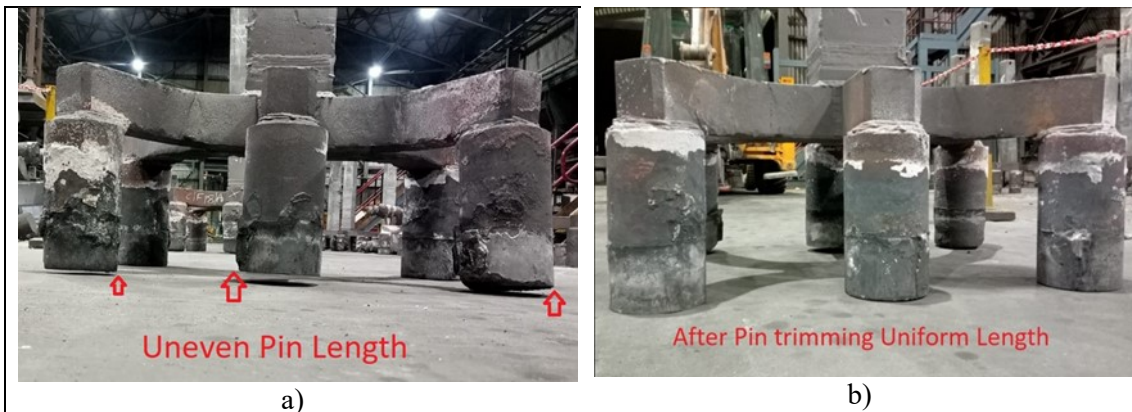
a) Before pin trimming one stem, b) After pin trimming one stem.
